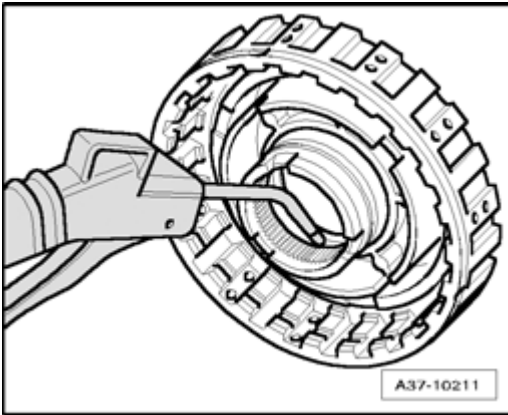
Pressing Piston "C" Out Of Cylinder "C" With Compressed Air
